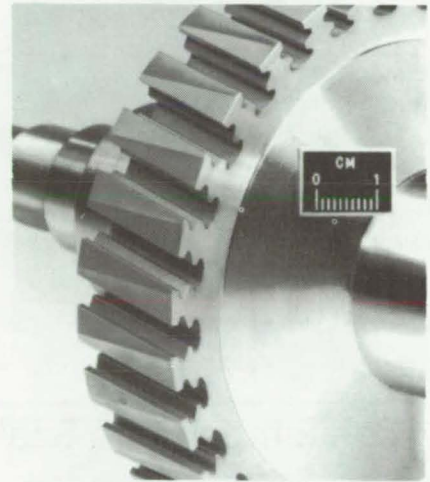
Dimensional Tolerances of 0.005 inch (0.1 mm) in high-strength, high-temperature material parts, such as turbine blade roots are possible with the Wire Electrical Discharge Machine method.
